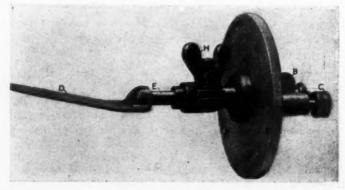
Profile view of the Larrad. A, disc; B, spirit level; C, pin; D, blade for attaching; E, shaft to be fixed parallel with the crank-shaft; H, winged nut fixing disc A to shaft E.
